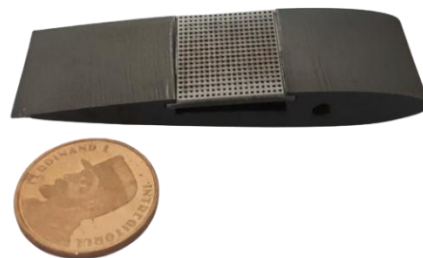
Waterjet cut airfoil and Aluminium insert for the control region (0.5 mm holes) (source: Chapter 4 [29])
